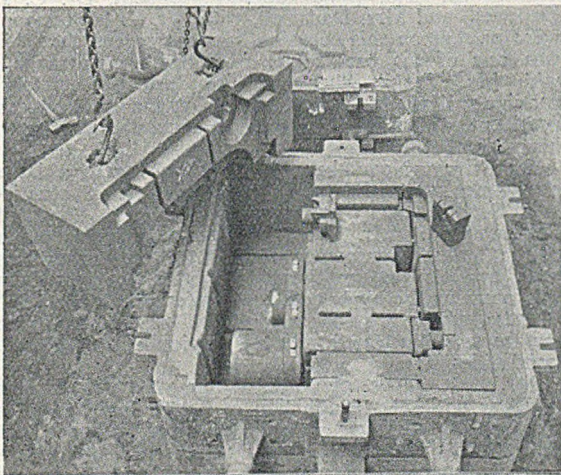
Gear-case Mould partly assembled with Bearing Cores, Body Core and Two Side Cores in Position.
